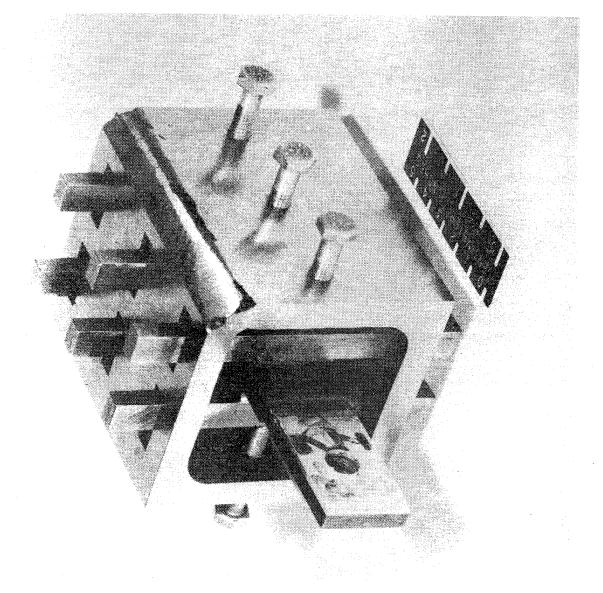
OPEN-HOLE, COMPRESSION BEARING, AND SINGLE-LAP TEST SPECIMENS
